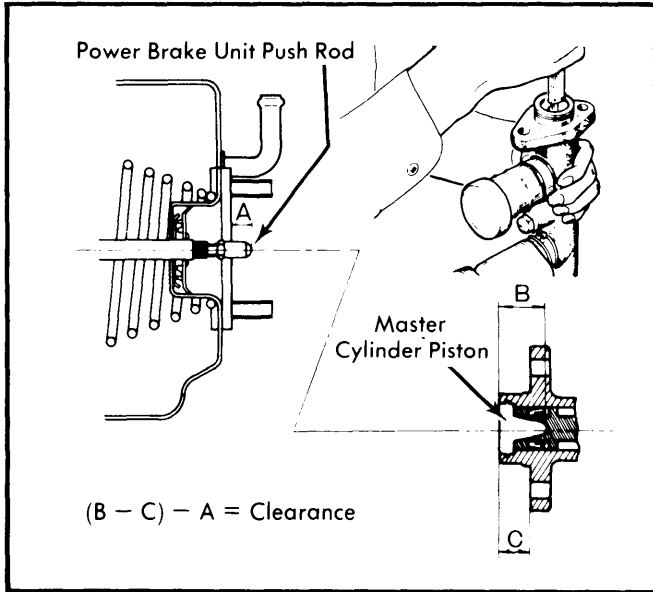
Locations for Measuring Master Cylinder Rod-to-Piston Clearance
